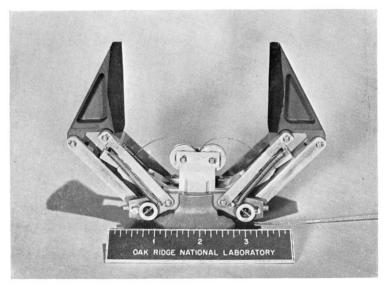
Master Slave Manipulator tong and inner-finger assembly.
